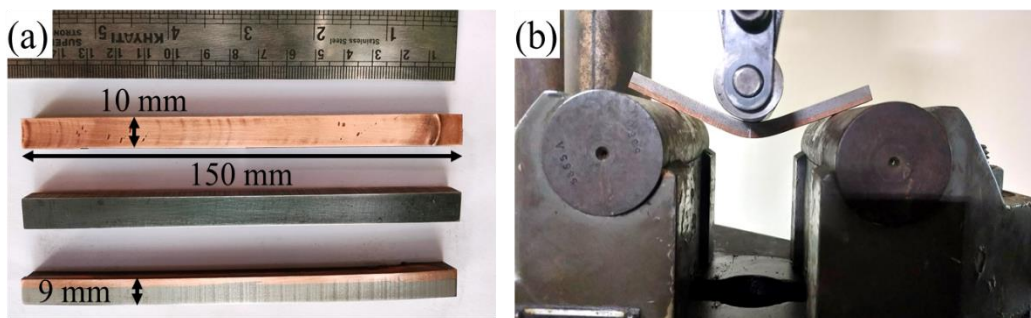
Prepared samples (a) for guided bend test (b) undergoing bend test
